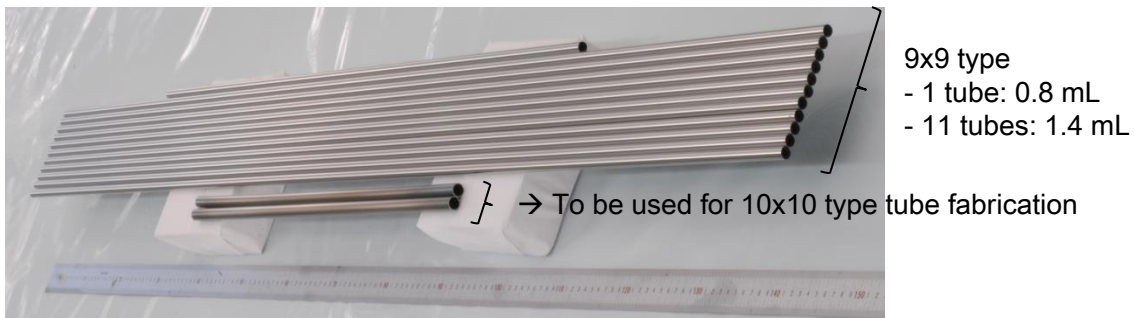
Overview of fabricated 9x9 type FeCrAl-ODS tube materials
